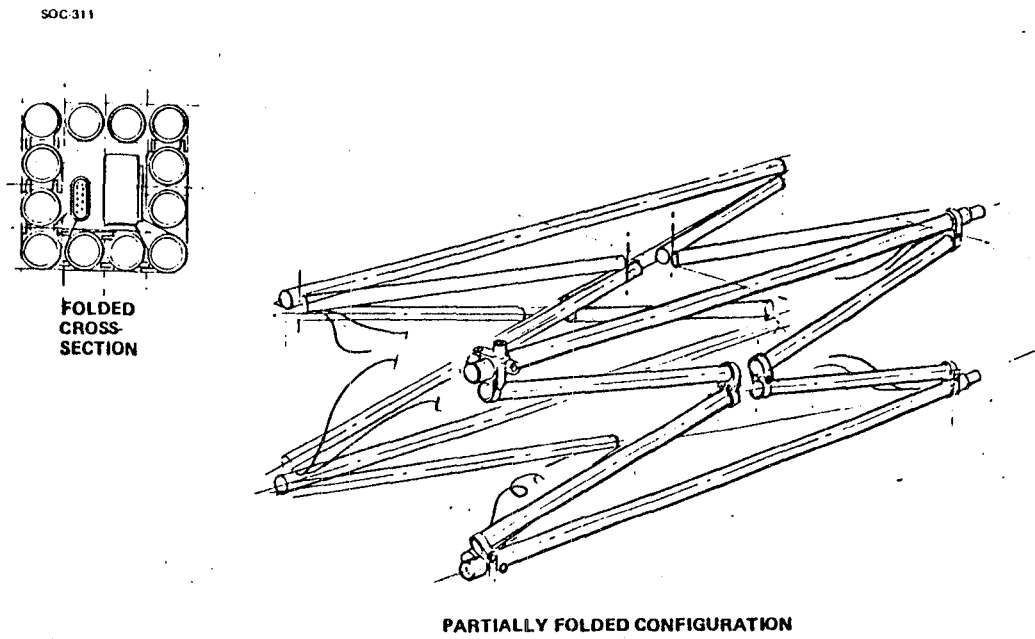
Figure C. Modular Construction Fixture Structural Building Block Collapsed Configuration
